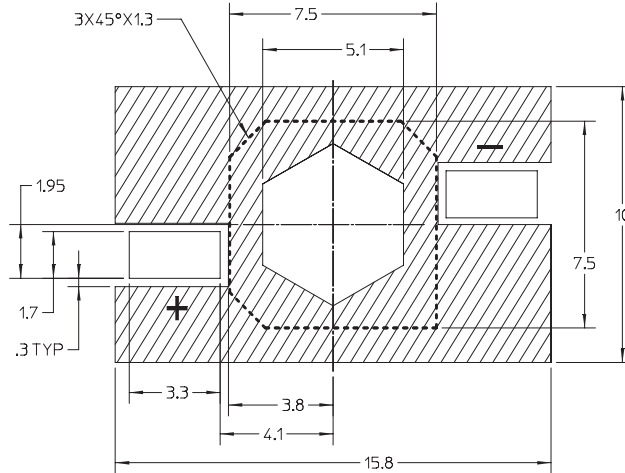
2-Lead Gullwing Package Solder Pad Layout.
